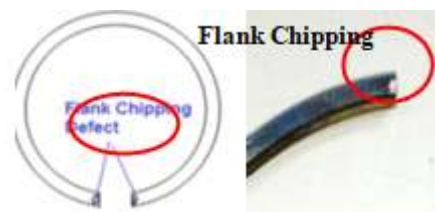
Flank Chipping Defect in I-Section Piston Ring
